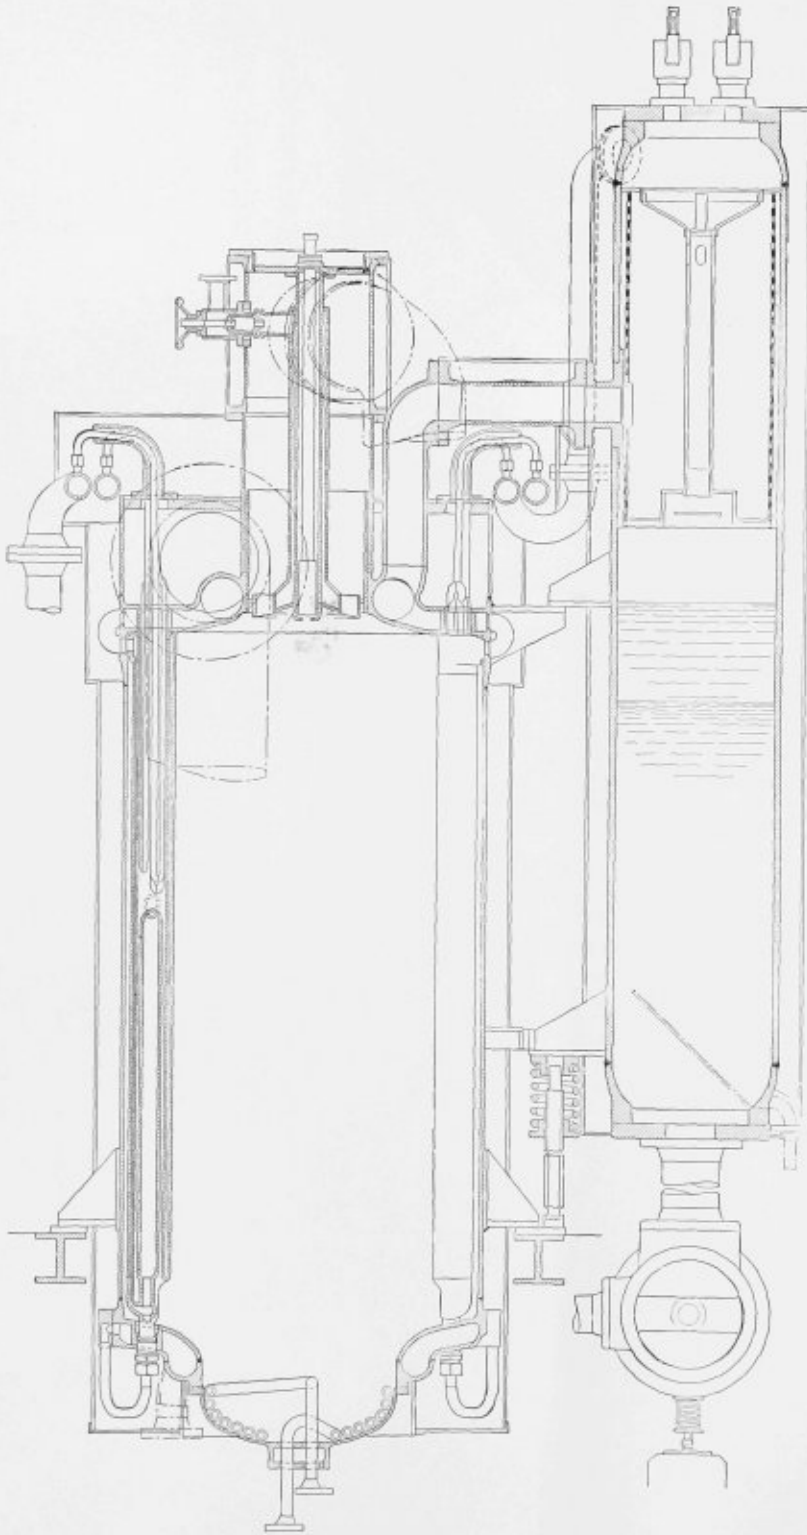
Section of Velox steam generator with superheater tubes built into evaporator tubes
